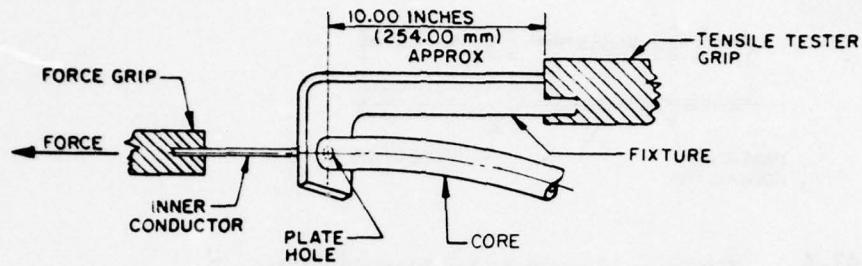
A: Typical Test Fixture for Use with Flexible Cables.
